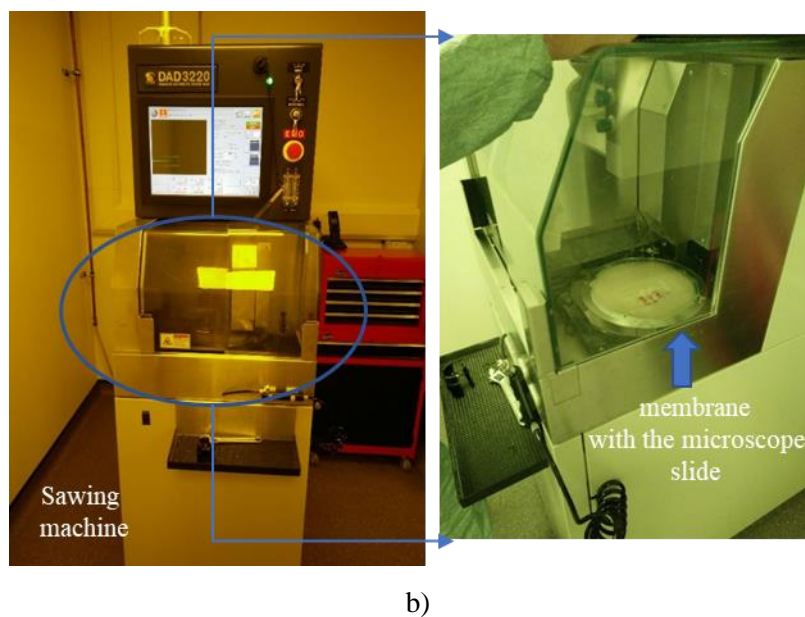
Sawing machine used in this work and b) photograph showing the membrane with the microscope slide inside the machine
